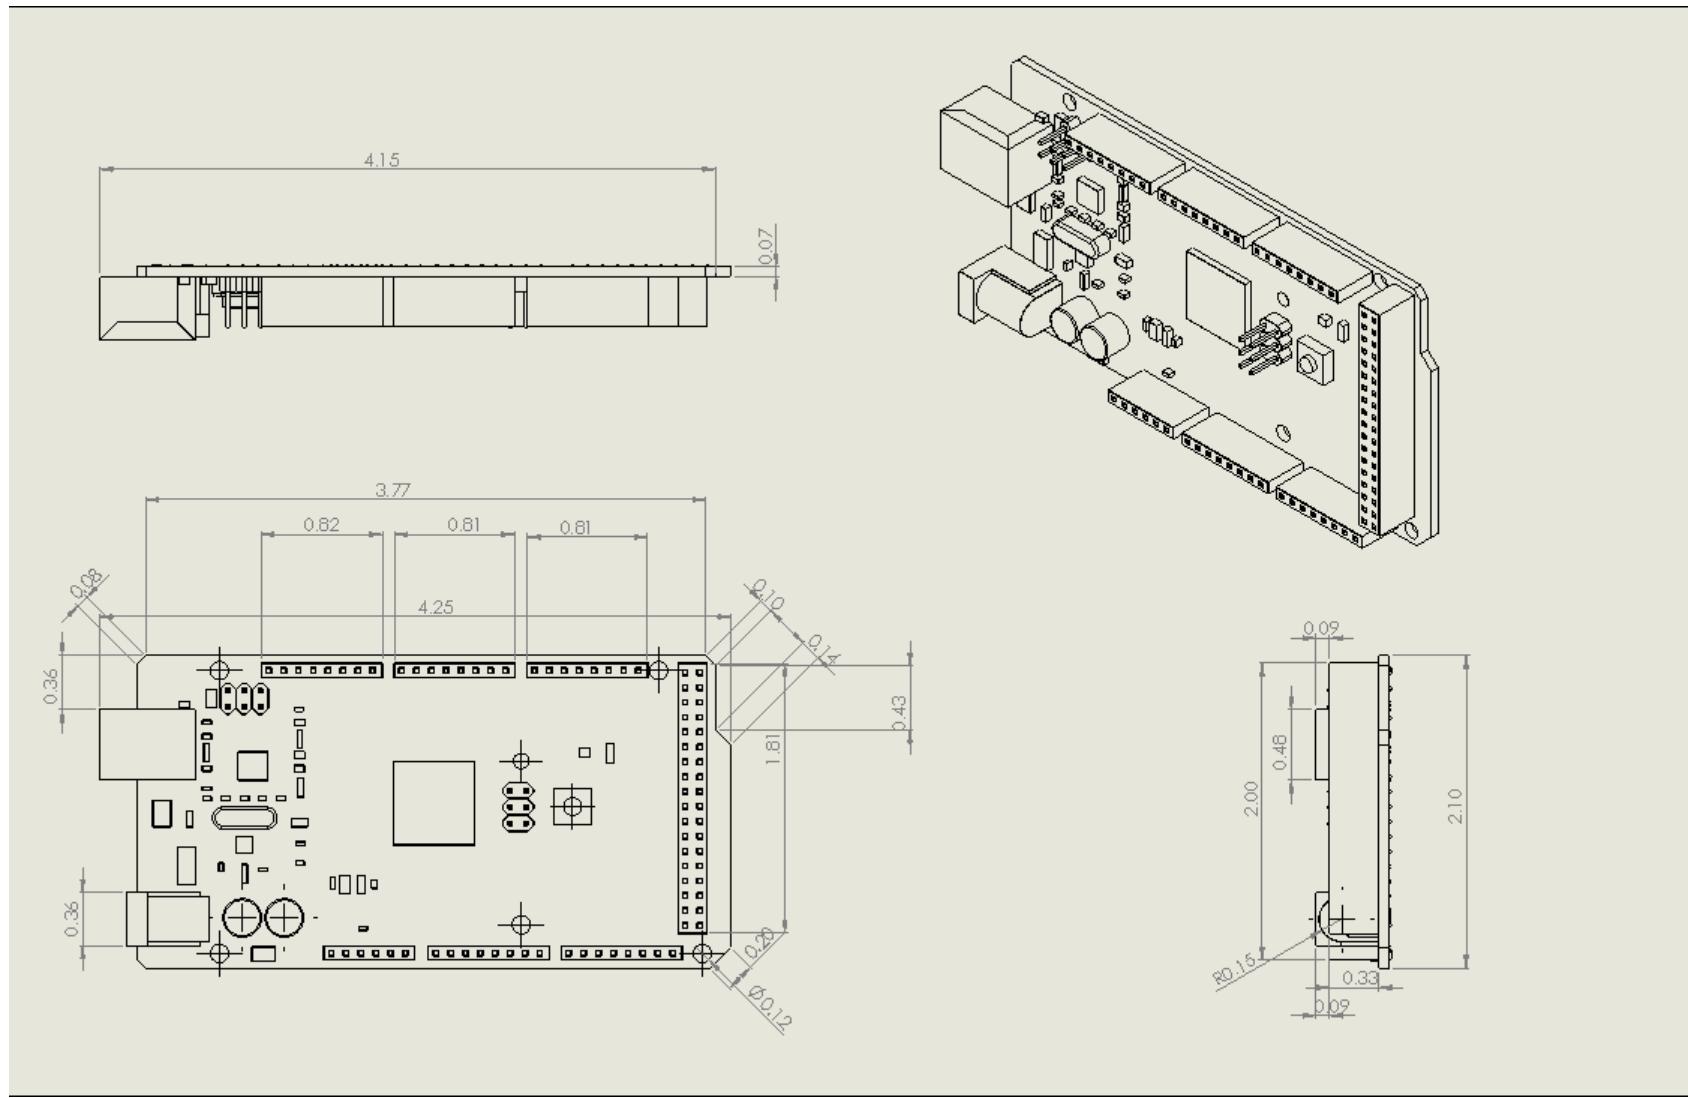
Part 1003 (Arduino Mega 2560 Rev3) Part Drawing
